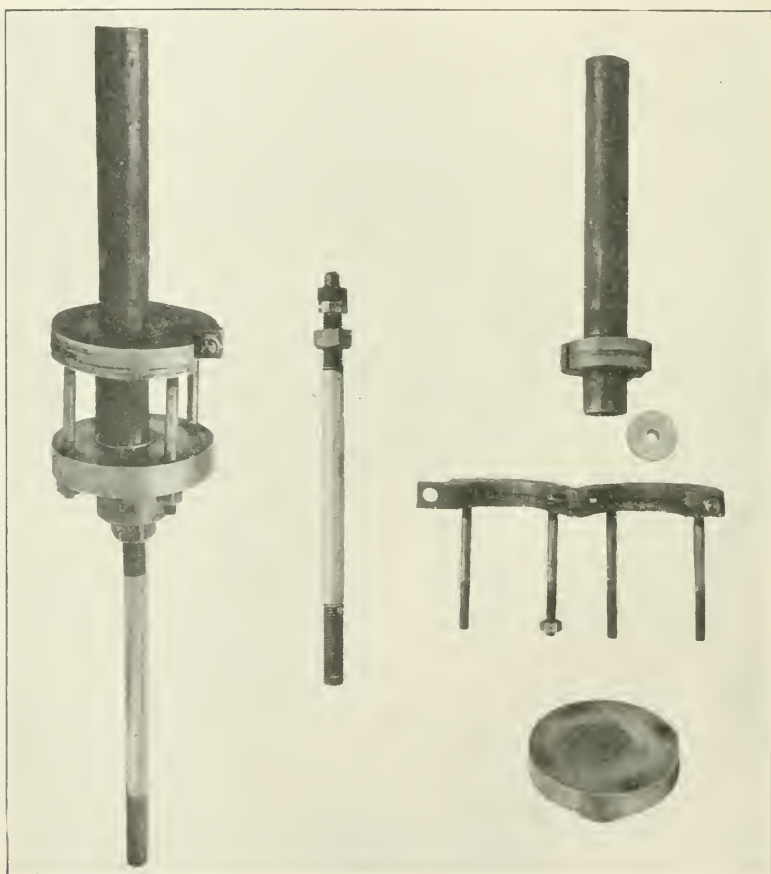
PARTS OF CLAMP FOR STOPPING END OF TUBE
